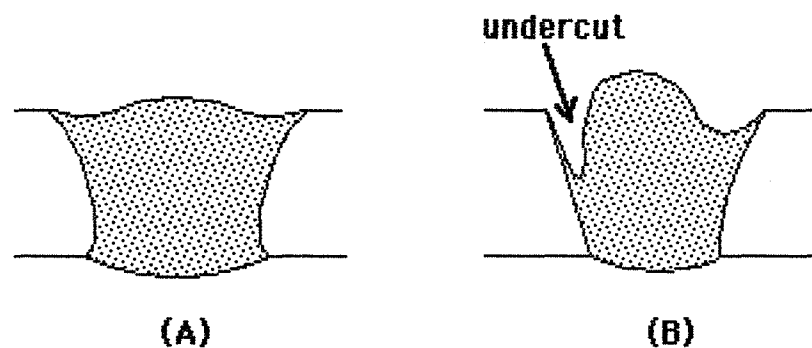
The shapes of the desired (left) and misaligned (right) shapes of the root pass weld metal.
